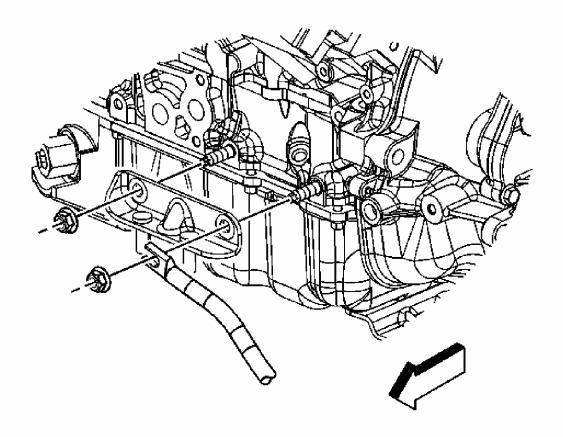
View Of Lower Engine Mount Bracket-To-Engine Stud Nuts Courtesy of GENERAL MOTORS CORP.
